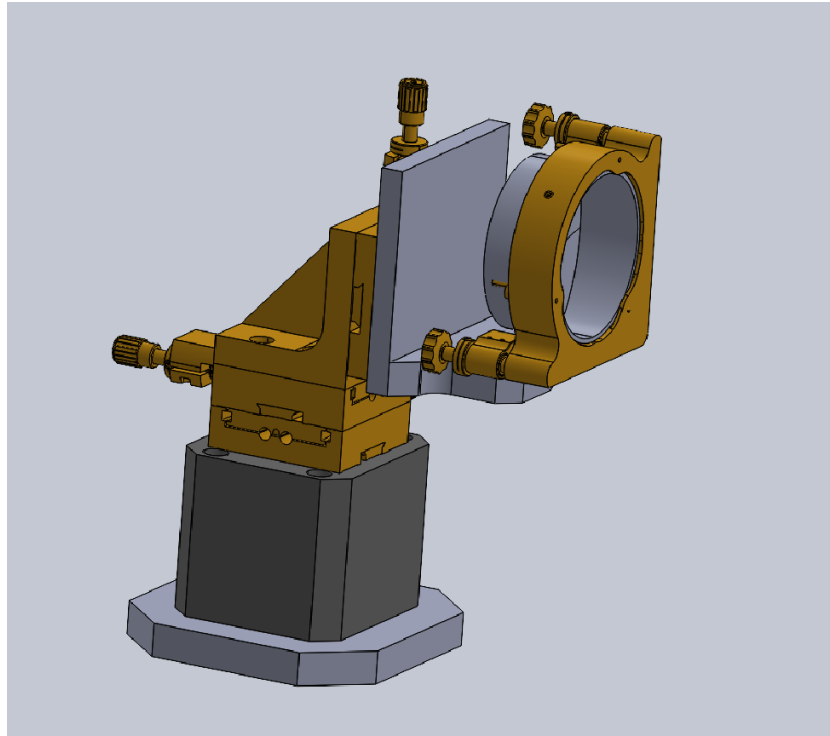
Mounting configuration for a 76.2mm-diameter off-axis parabolic mirror. Off the shelf parts are shown in gold and machined parts are shown in grey.
